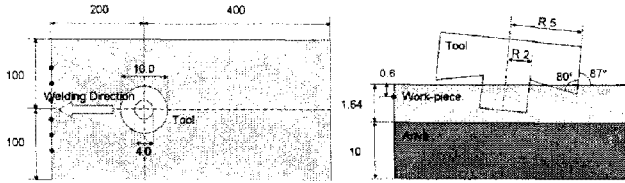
Dimensions of the thermo-mechanical model: (a) top view (b) section view of the tool (in mm)
